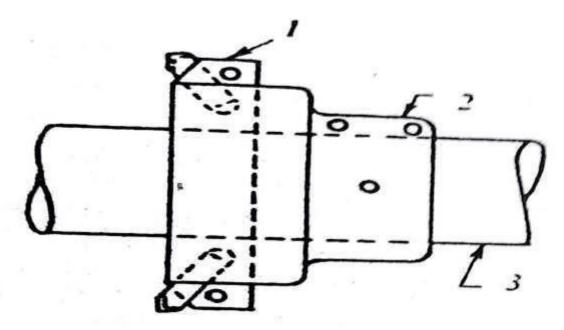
Boring head 1. Cutter, 2. Boring head, 3. Boring bar.
